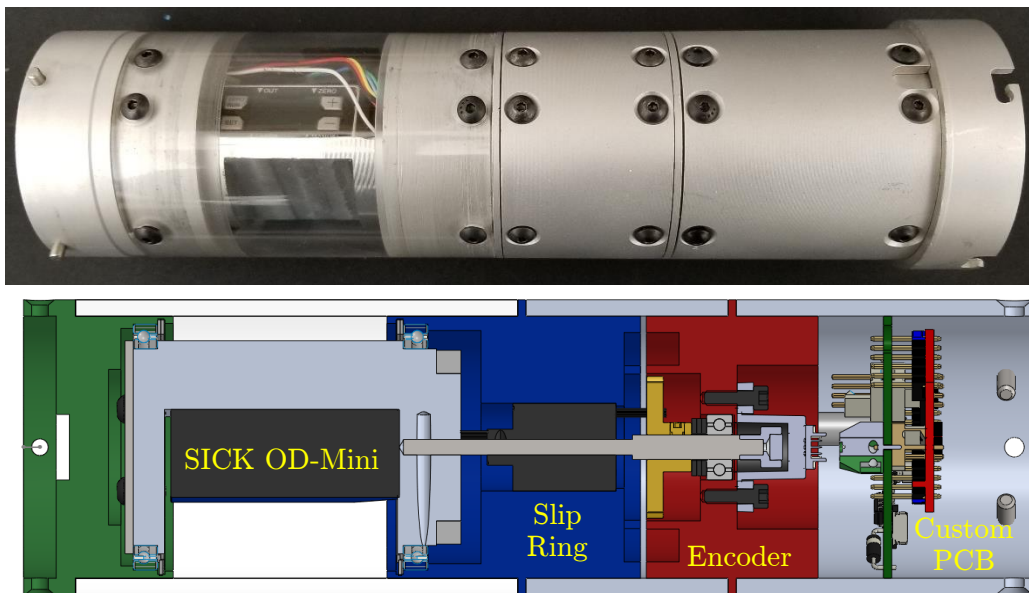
Fabricated profiler (top) along with cross-sectional view (bottom). The profiler is composed of a SICK ODMini, a slip ring, micrometal gearmotor, magnetic encoder and custom data processing PCB.
